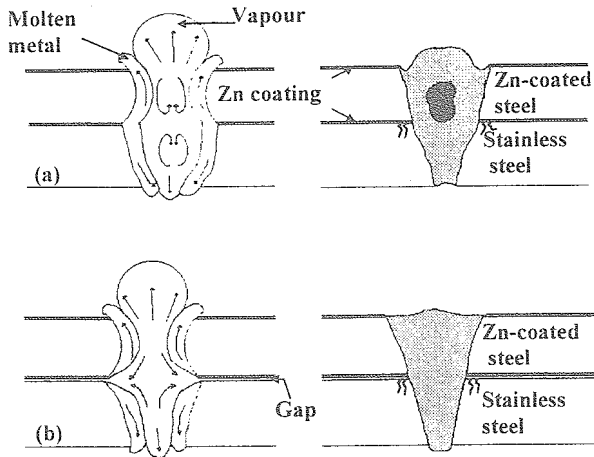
Schematic illustrations showing the effect of introducing a gap between the sheets being welded on weld zone profile, porosity, and LME cracking
